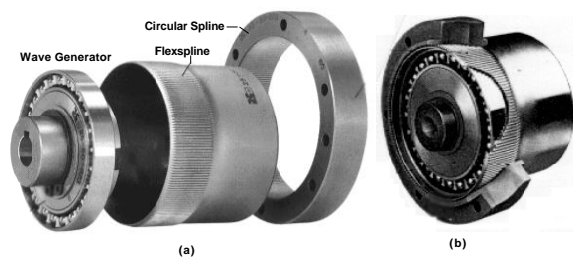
Harmonic Drive Gear Components (a) and Assembly (b) [4]
